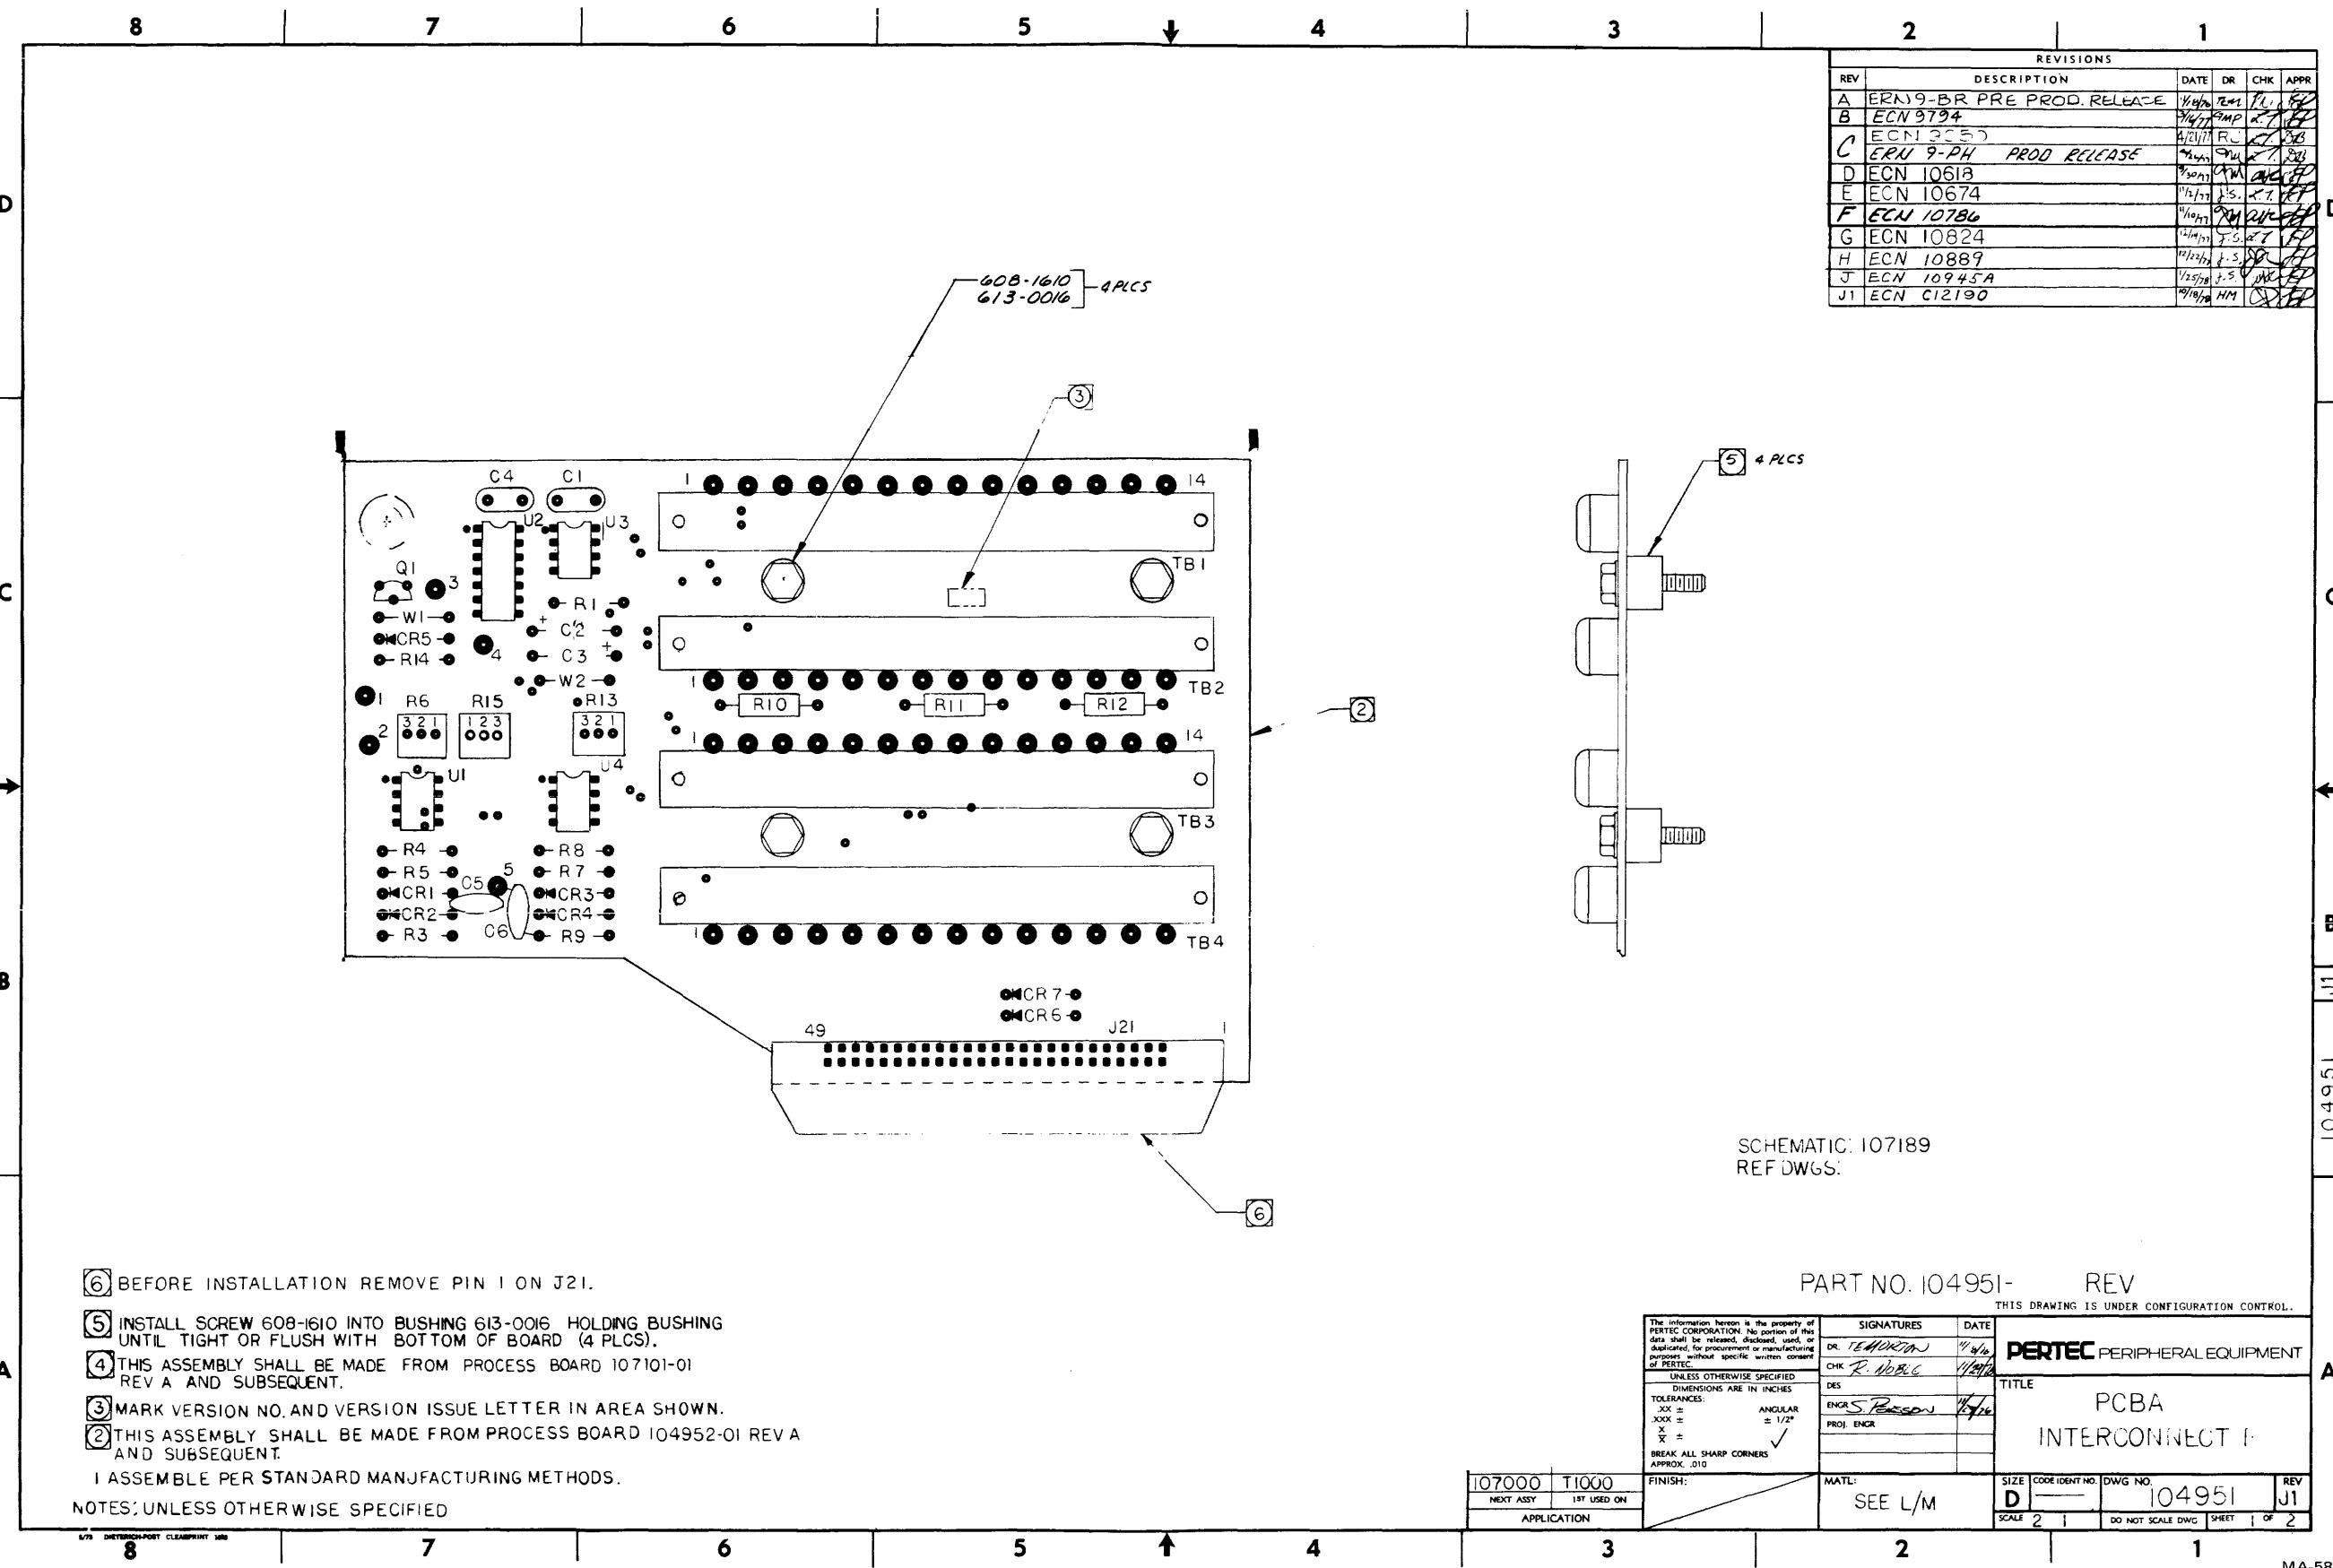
PCBA, Interconnect F (Sheet 1 of 2)
